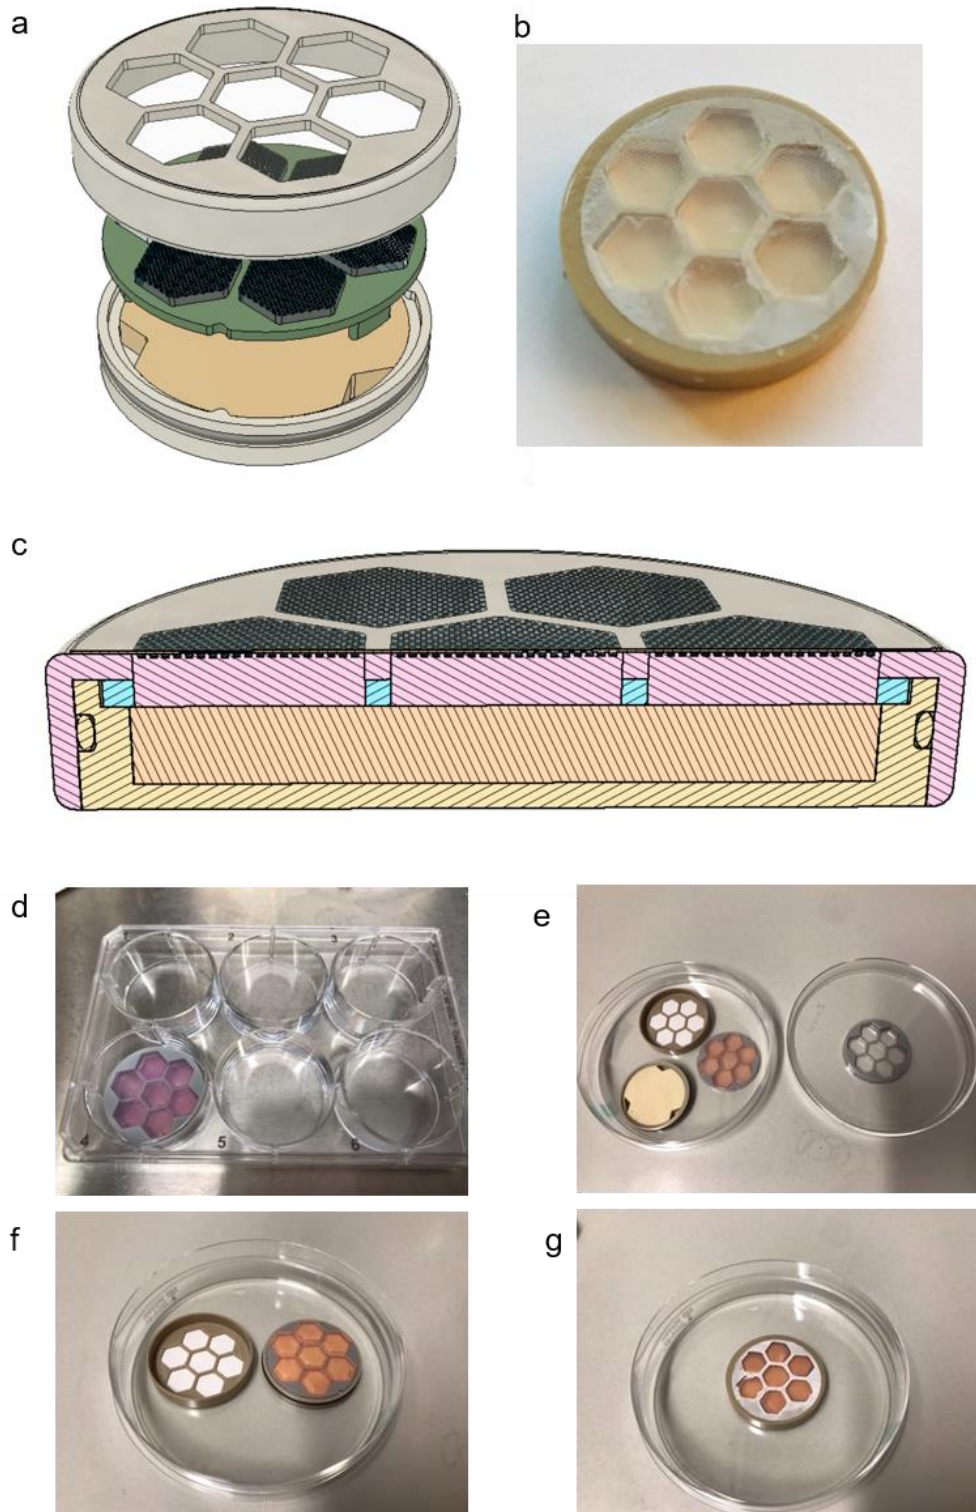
Final assembly of the encapsulation device modules for implantation. a Exploded view of assembled device components. b Photograph of high fidelity prototype manufactured by CNC milling in PEEK. c Cross section of completely assembled device depicting the placement of the islets directly under the immunisolating membrane. d Islet holder filled with hydrogel microwell arrays and funnel in 6-well plate to allow islet aggregation. e Single device modules before assembly. f Islet holder placed on skeleton. g Closing of device with membrane module.
